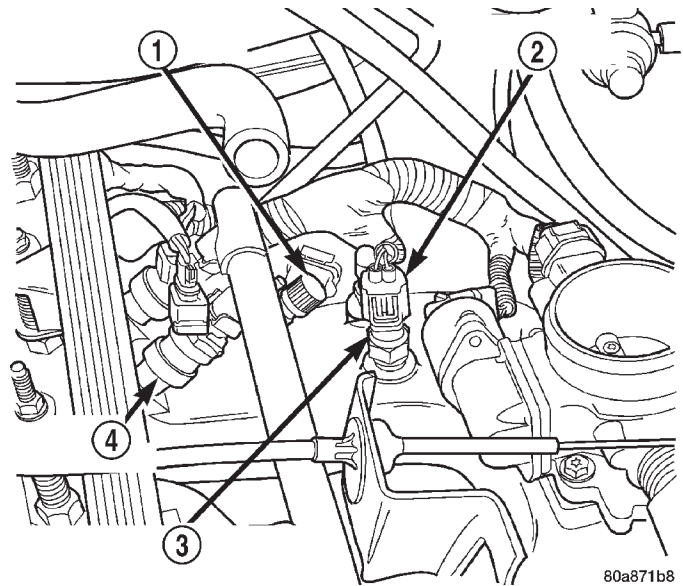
Intake Manifold Air Temperature Sensor—2.5L Engine
